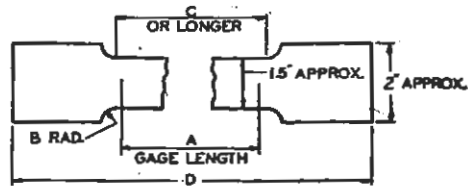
Flat Tension-test Specimen for Material over  $\frac{3}{8}$  Inch Thick
